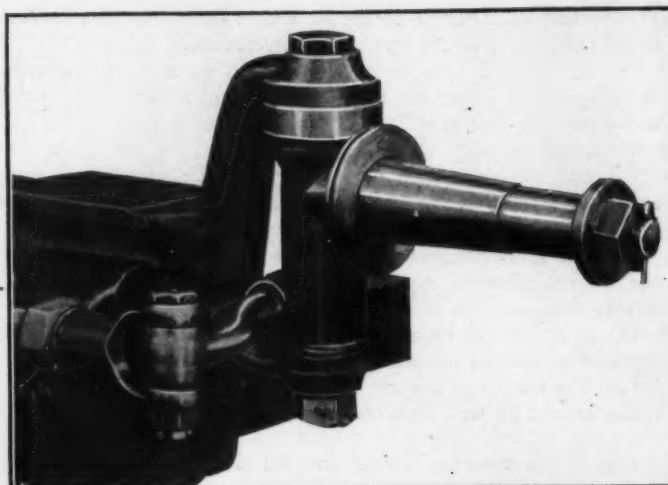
Assembly of steering knuckle, showing Clevis arrangement
